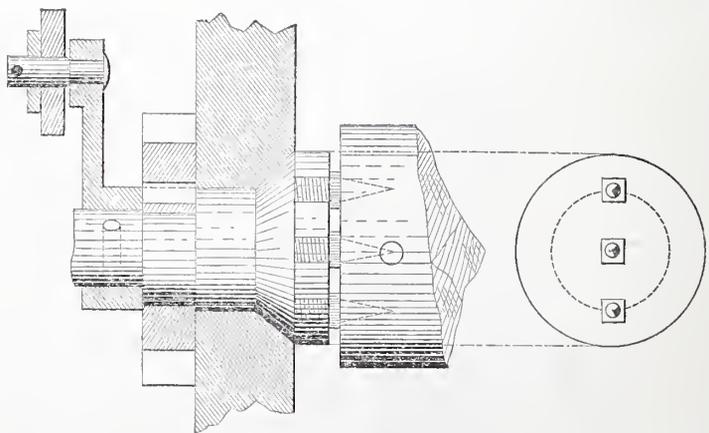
Detail showing Method of Fastening the Pieces to the Spindles.
